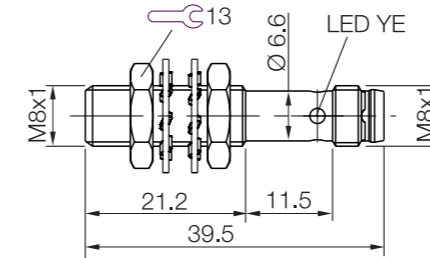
Dimensions BOS 08E-...-S49. LED on the receiver
